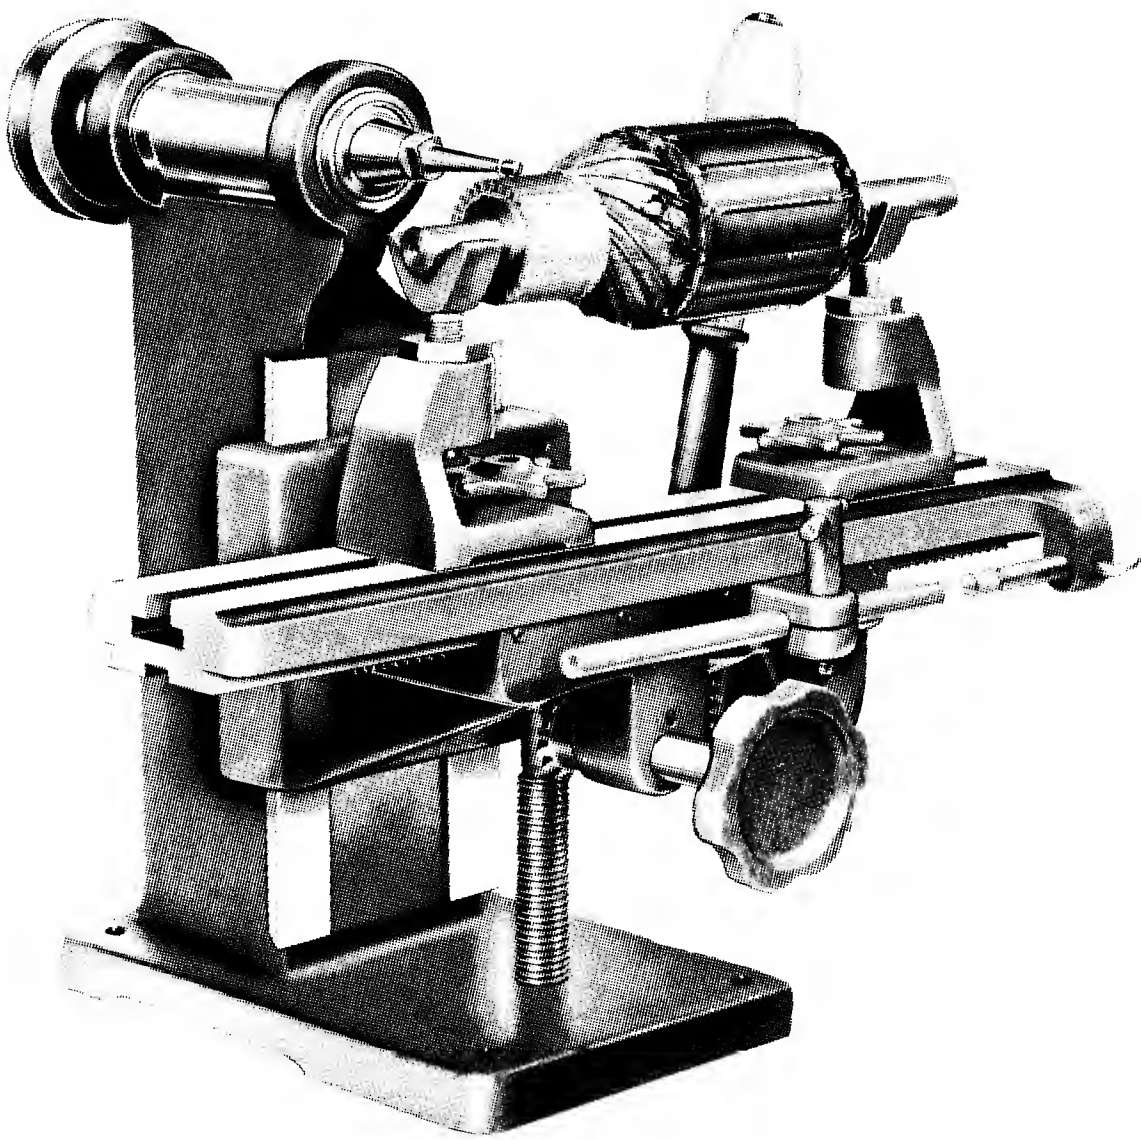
Peerless Mica undercutter. (Peerless Tool Division Cam Industries Inc.)
